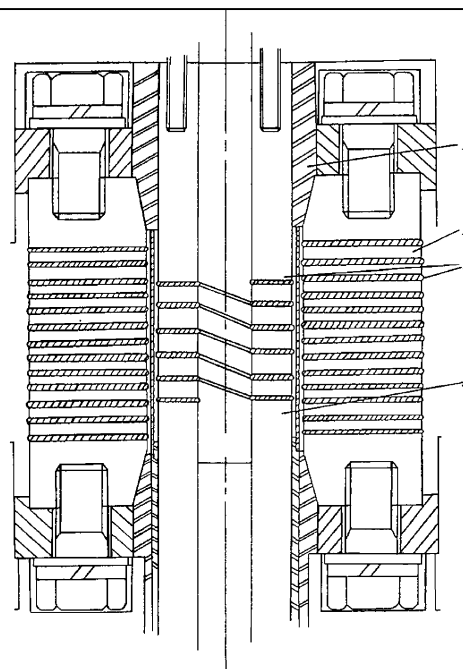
Section view of the standard 2-layer magnet: 1—insulator, 2—outer coil, 3—inner coil.
